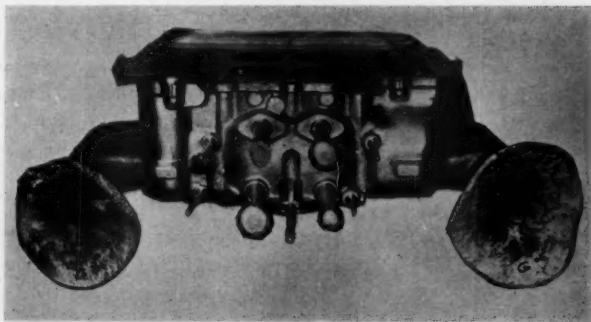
ORIGINAL METHOD OF GATING CARBURETOR CASTINGS. THE TWO GATES (G) WERE ALSO USED AS FEEDERS.
